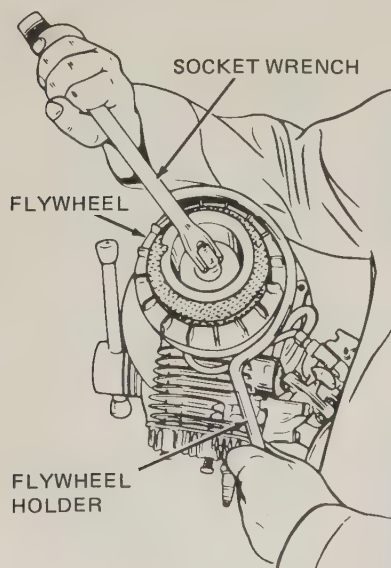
Removing the flywheel attaching nut while holding the flywheel with a special holder. (Tecumseh Products Company)
